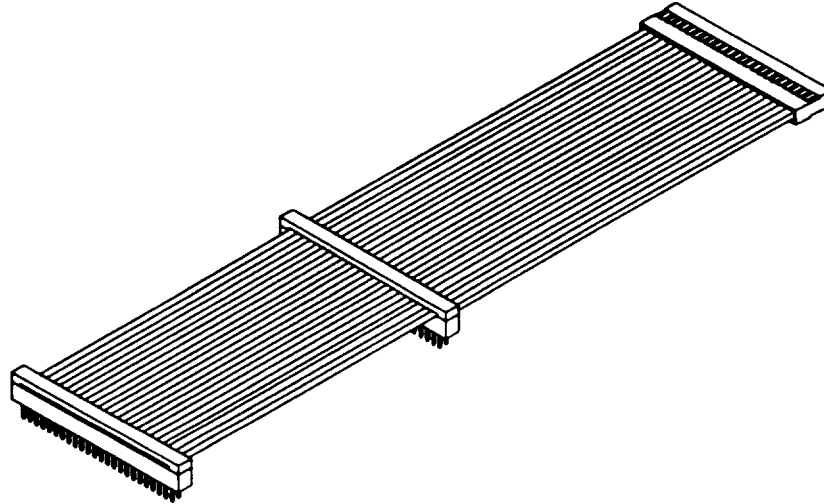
Maintenance of Cable Assembly, SP, Elec-Y-Ribbon (A14W1).
